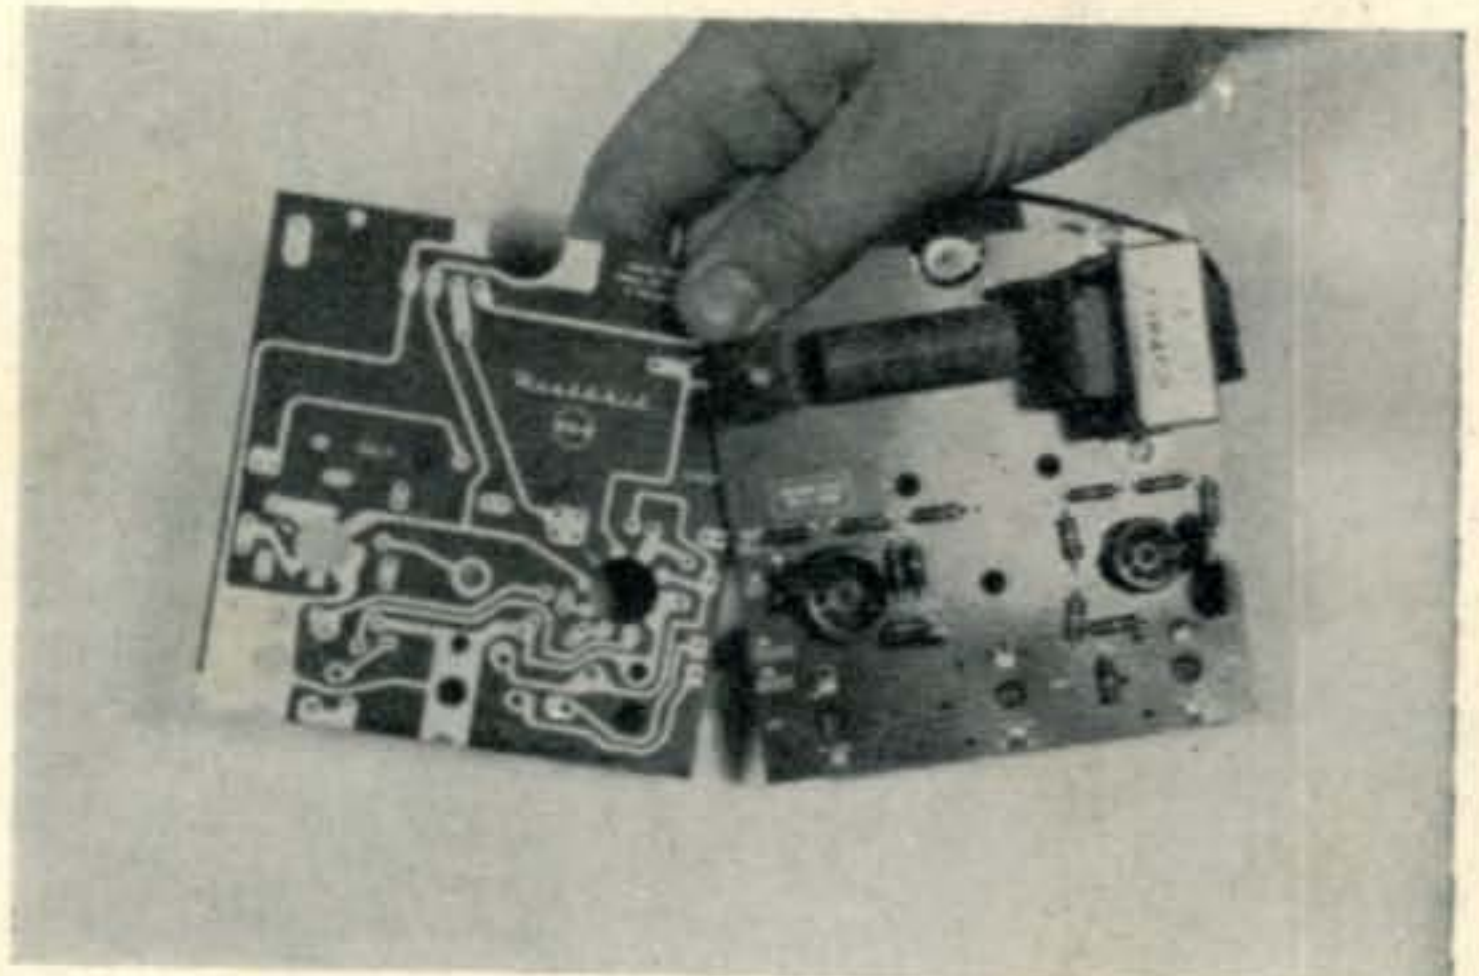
Example of commercially available etched circuit boards in kit form. Courtesy Heath Company, Benton Harbor, Michigan.
